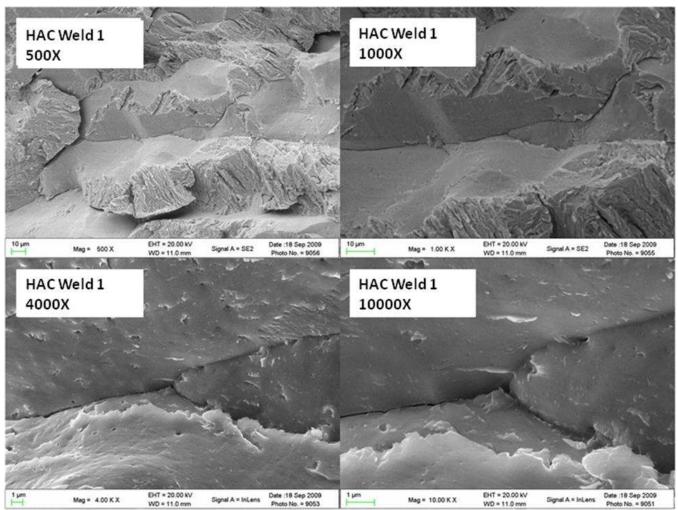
SEM of the HAC surfaces in GTAW weld deposit of the 22V SAW weld 1 deposit. Note the Intergranular macro-morphology with transgranular crack propagation revealing a quasi-cleavage morphology.
